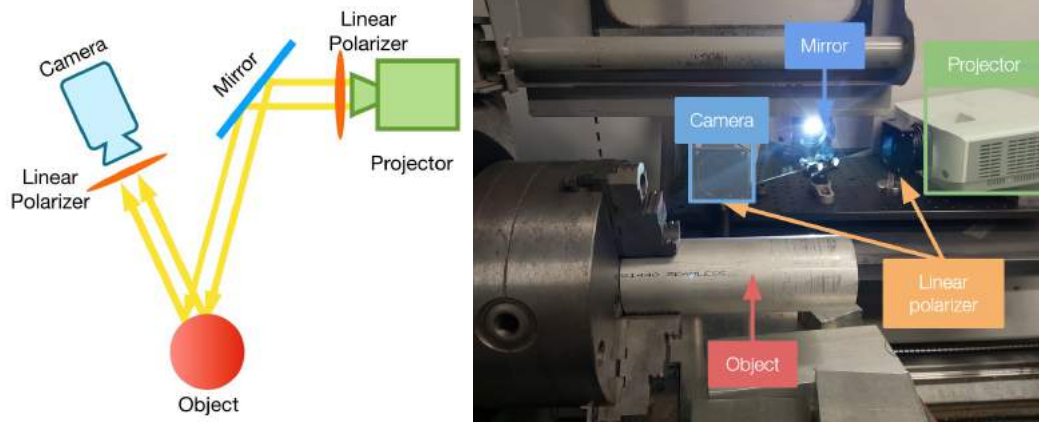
3D scanning setup on a representative CNC lathe machine.
